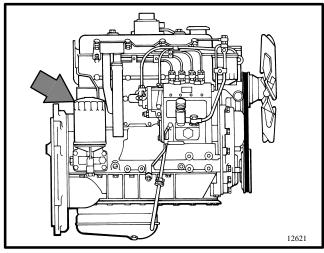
OIL FILTER ASSEMBLY, LATER PRODUCTION ISUZU C240 ENGINES
